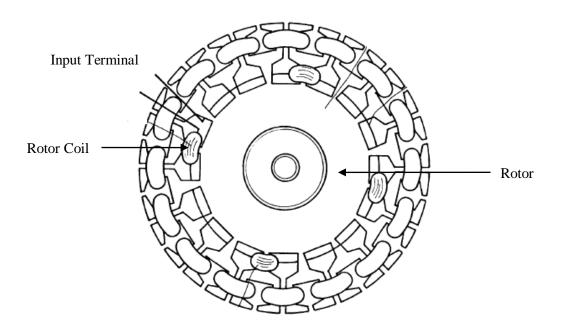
Rotor Coil (Skip or pass through winding process) [5]
